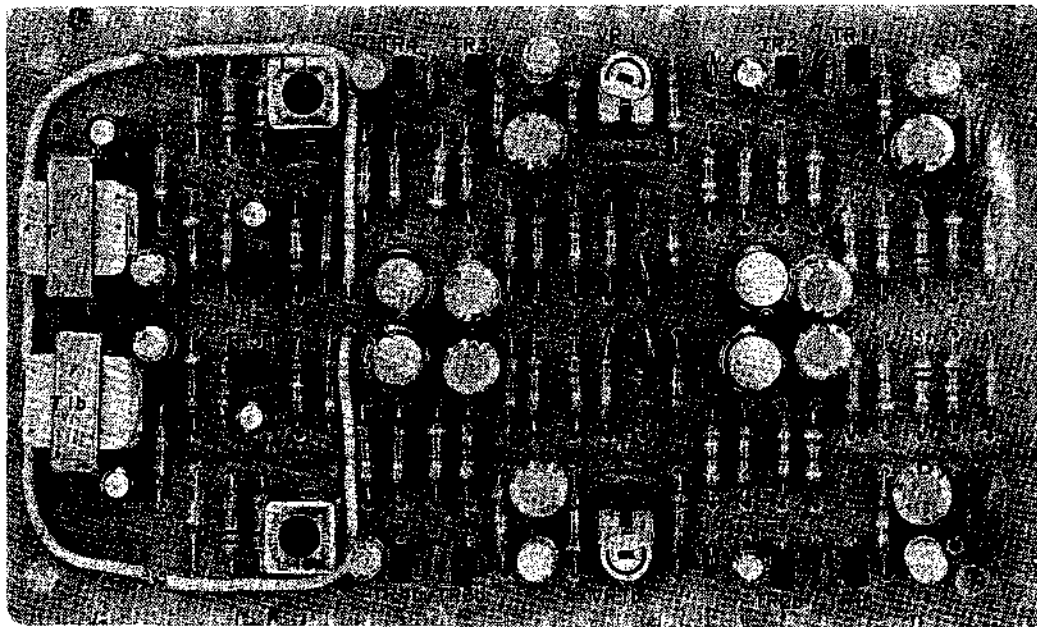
PB. AMP. P.C. BOARD TD-5004 (Front Side)
